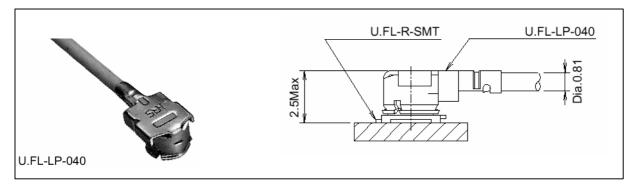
U.FL-R-SMT connector with U.FL-LP-040 plug
